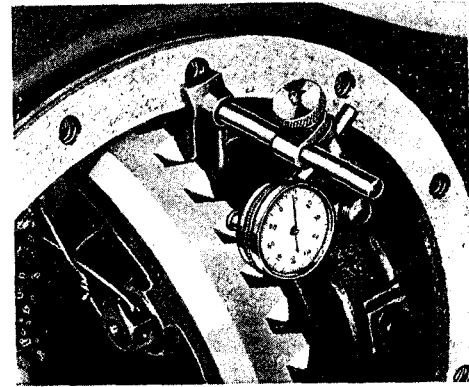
Checking backlash between ring gear and drive pinion with dial indicator and holder, Tool No. HM-91220. Backlash should be .004 to .012 in.
